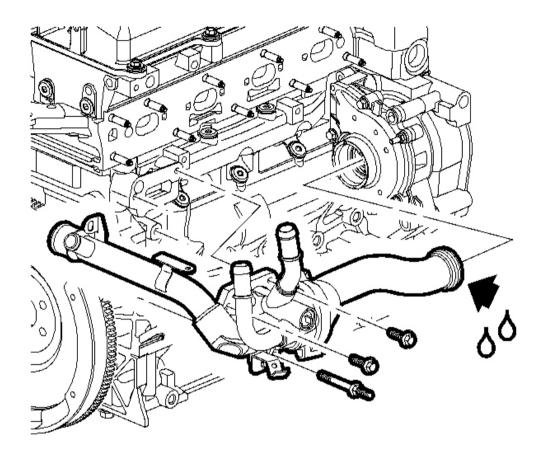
View Of Thermostat Housing To Block Bolts Courtesy of GENERAL MOTORS CORP.
